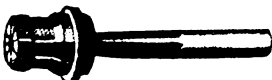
"IDEAL" SECTIONAL TUBE EXPANDER
